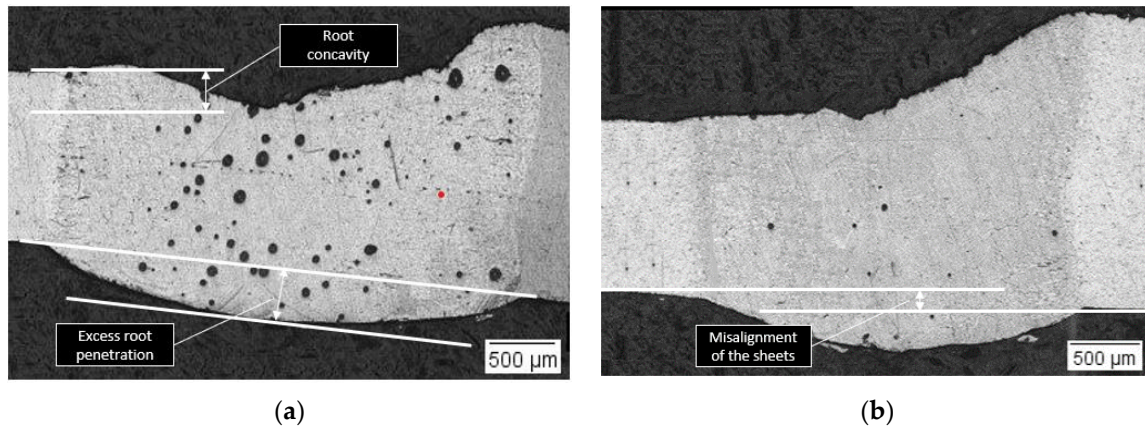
Welded joint imperfections according to the ISO 13919-2 standard: (a) root concavity and excess root penetration; (b) misalignment of the sheets.
